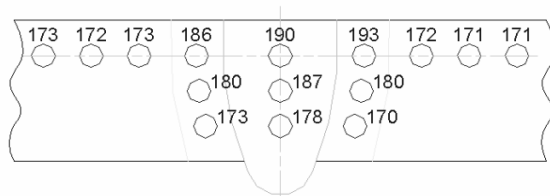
Hardness distribution HV 10 on the section of welding cold forming shape 100x150x6,3 mm of S235JRH steel in the welding zone
